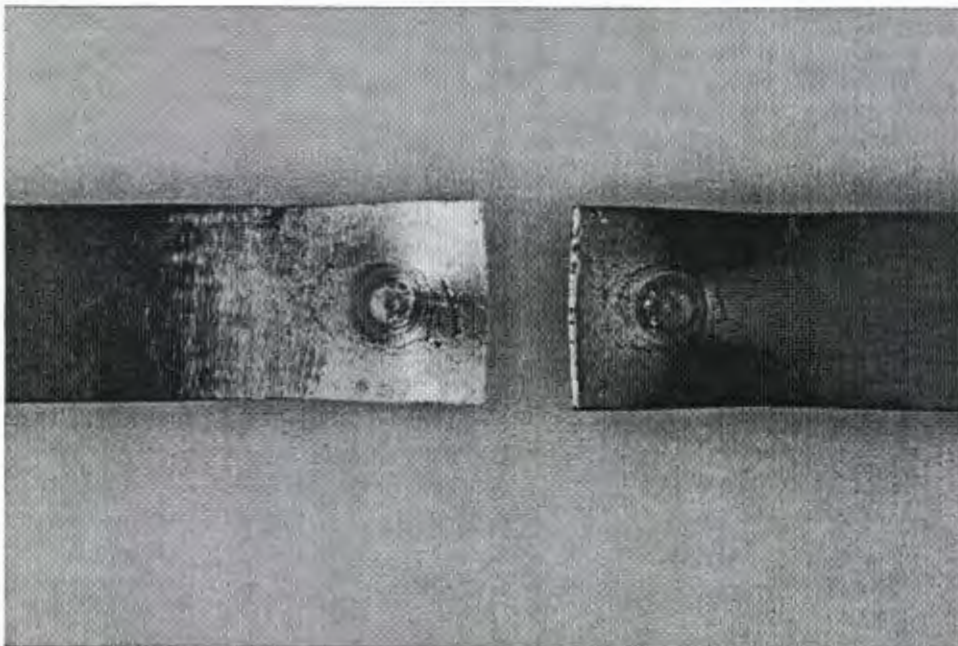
"Weld shear" failure of an improved spot weld tensile shear specimen; magnified 1x.
